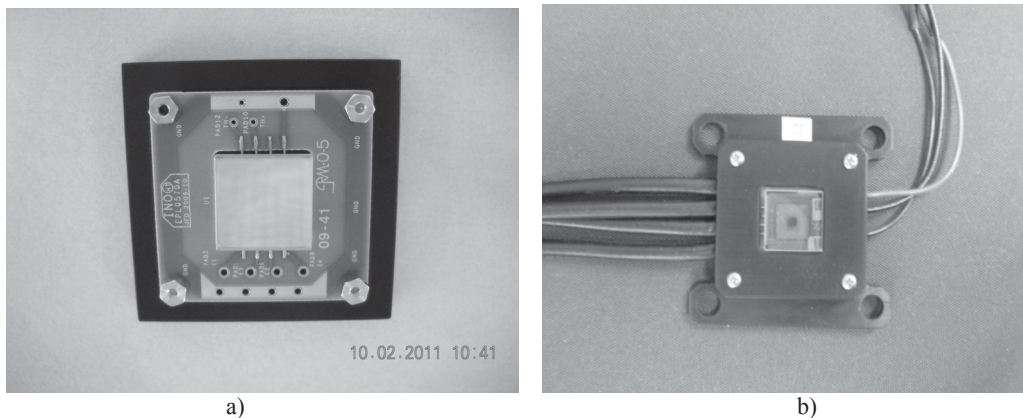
Mirror housing module: a) Package pins soldered to the PCB, b) Device module in its final assembly state.
